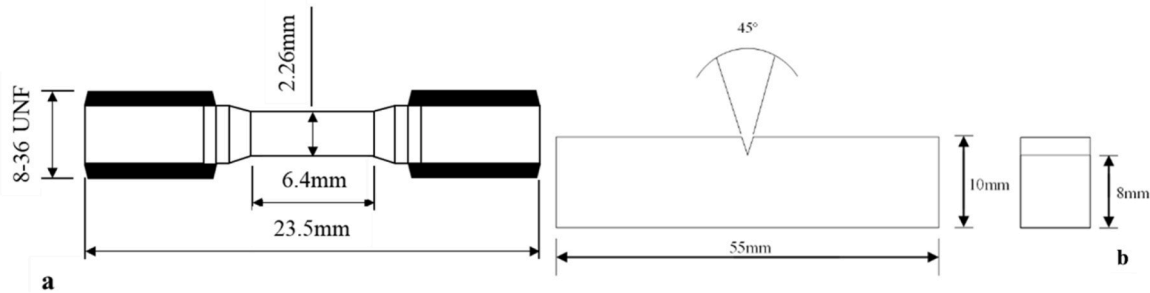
Test piece geometry for a) Uniaxial tensile b) Charpy impact experiments.
